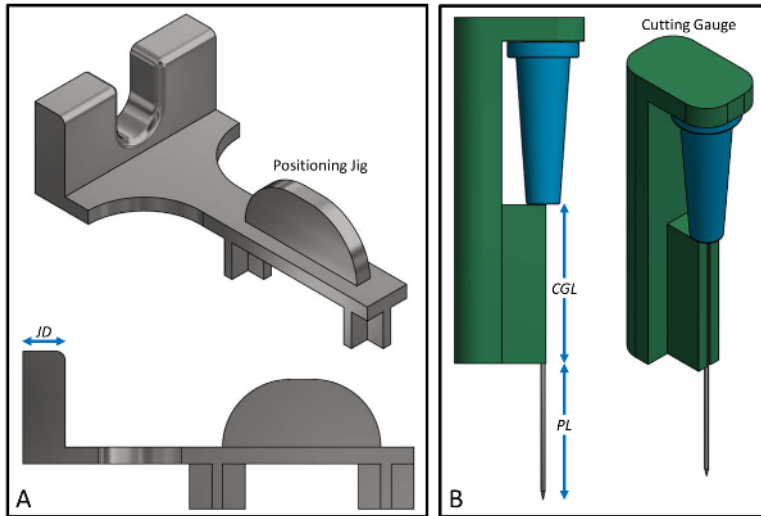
Positioning jig and cutting gauge design. (A) This panel shows details of the mouse positioning jig. The jig depth (JD) can be adjusted to change the fracture location on the limb. Increasing JD will move the fracture proximally and decreasing JD will move the fracture distally. (B) This panel shows details of the needle and the pin cutting gauge. The pin length (PL) should be 90% of the limb length (LL) (Figure 1A). The cutting gauge length (CGL) is derived from subtracting the PL from the needle length. In this example, a cutting gauge has been constructed ($CGL = 1.6$ cm) to demarcate a 27-G needle (length = 3.175 cm), leaving a PL of 1.58 cm after cutting. [Please click here to view a larger version of this figure.](#)
